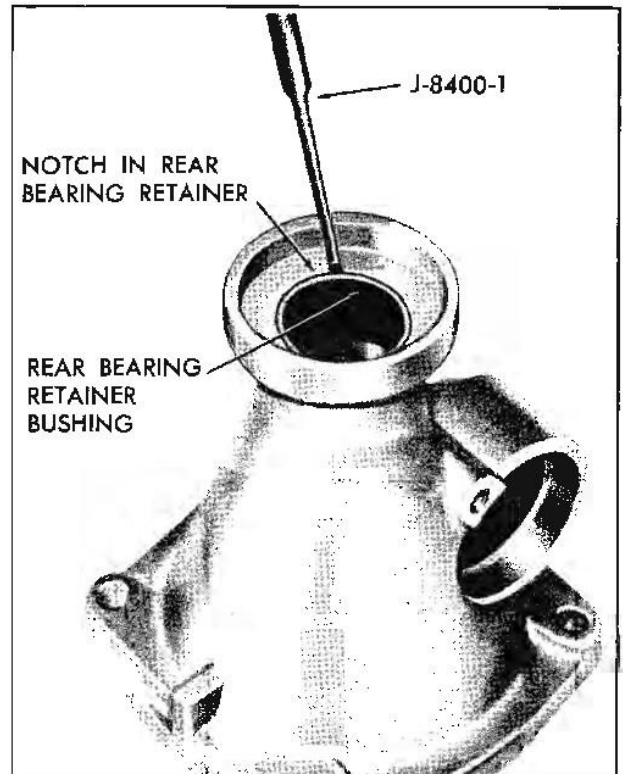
B-32 Removing Rear Bearing Retainer Bushing
